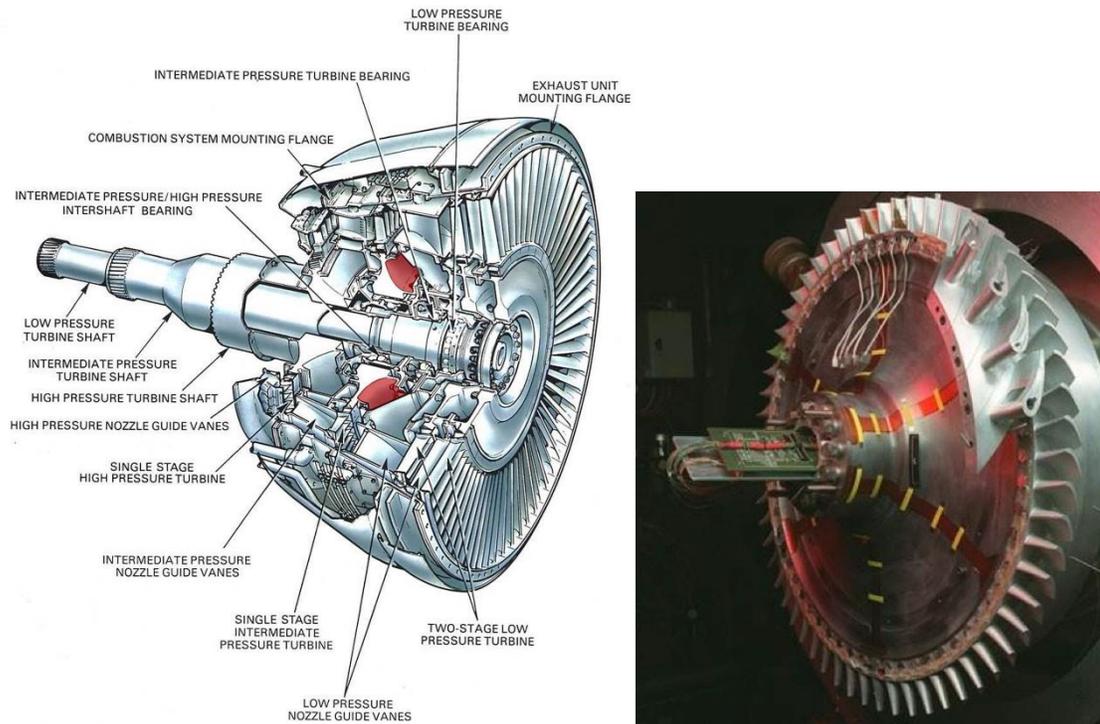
Turbine layout with highlighted rotor-stator cavity (left) [?]. Instrumentation on turbine rotor surface (right) [?].
